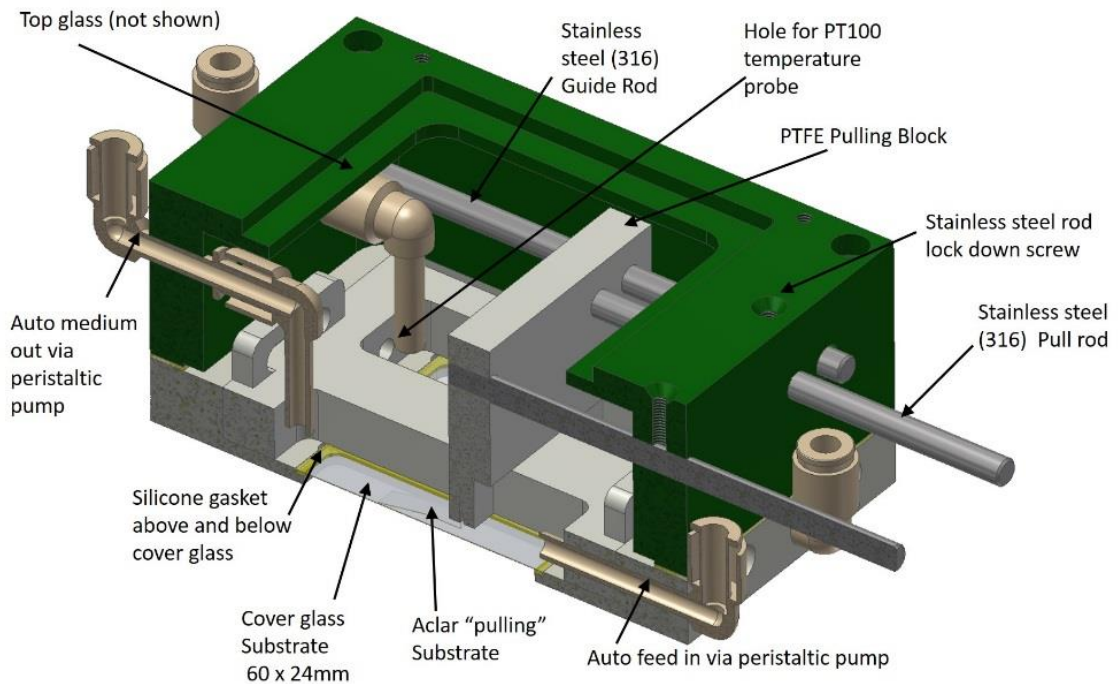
Sagittal view example of a more advanced bioreactor (top aluminium machined (PTFE coated) bottom section machined from solid PTFE). Standard base plate not shown.
